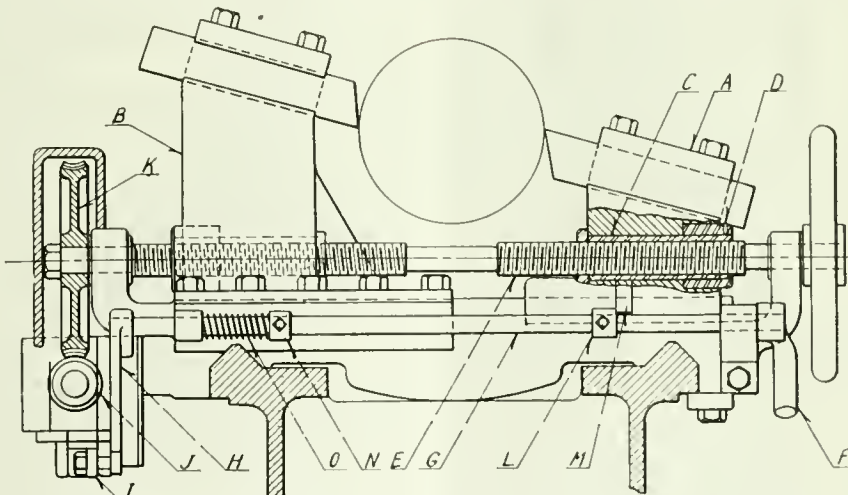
CROSS FEED ON SPECIAL SHELL MACHINE.
